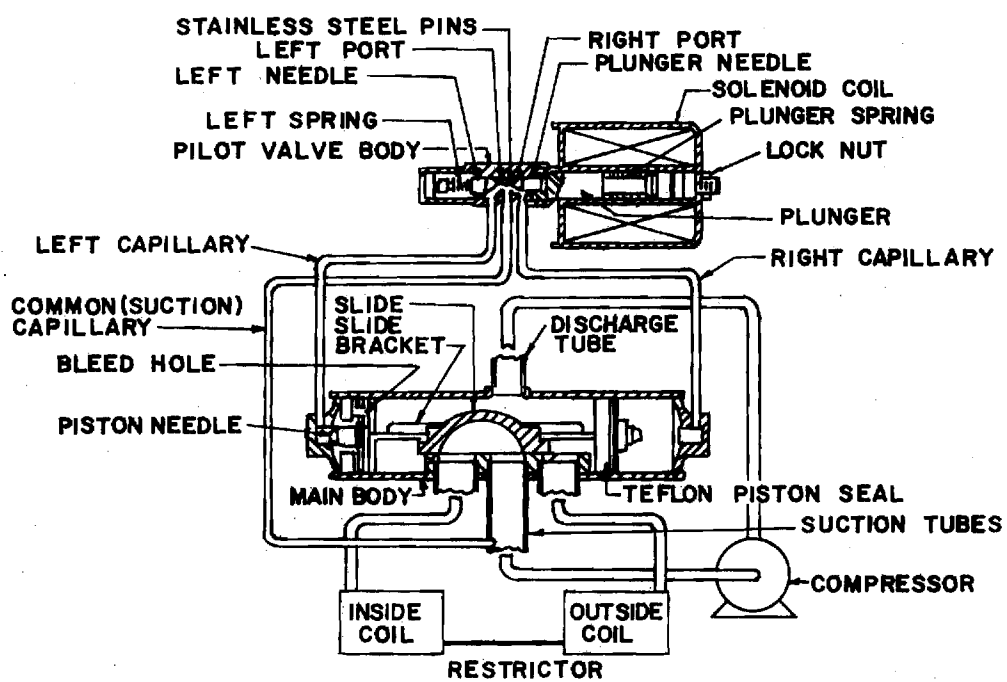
<sup>(9)</sup> SECTION VIEW OF REVERSING VALVE
